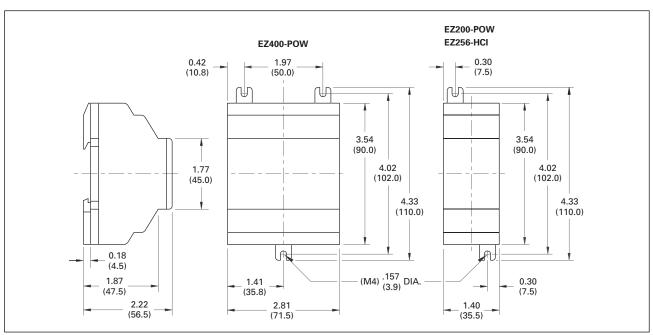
EZ200-POW/EZ256-HCI and EZ400-POW Series Dimensions in Inches (mm), Drawing Number MD05013004E
